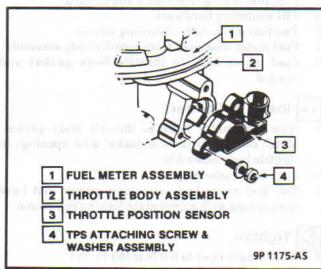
Throttle Position Sensor (TPS) - TBI 700
